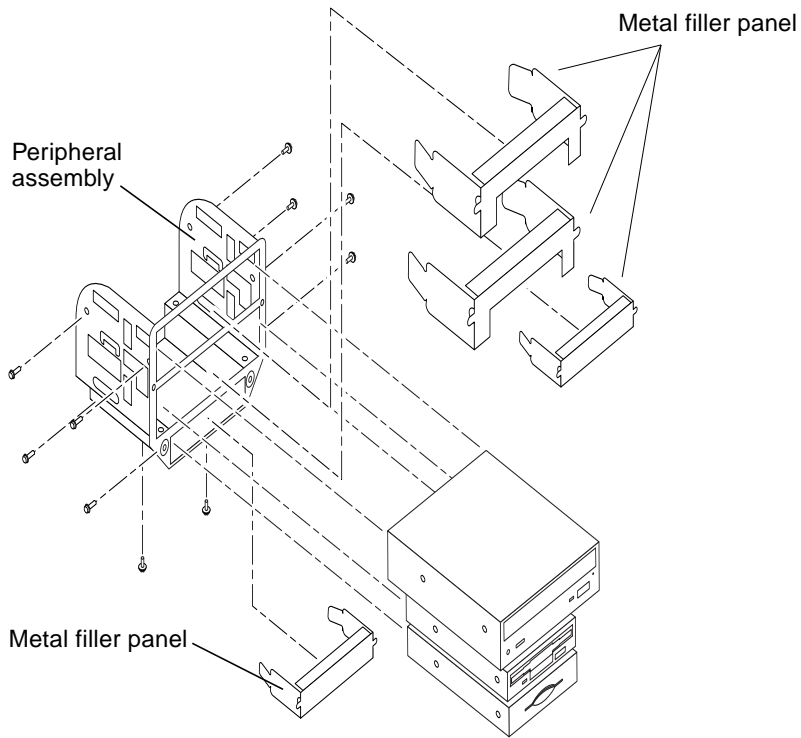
Removing and Replacing Metal Filler Panels
